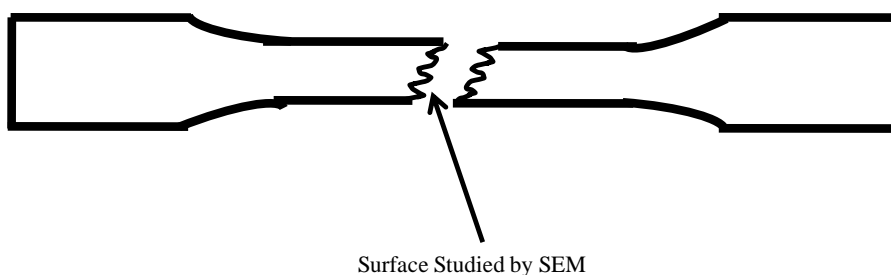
Tensile deformed specimen for fracture surface analysis by SEM
